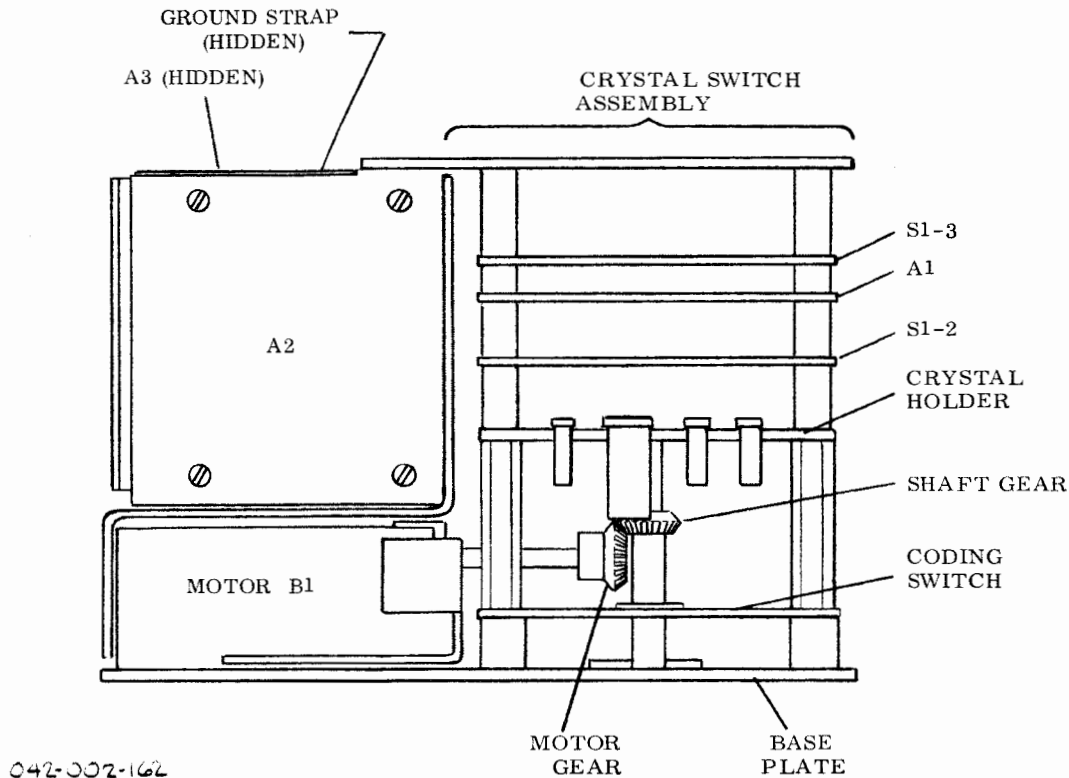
1-MHz Synthesizer Subassembly A2A6A1, Disassembly Parts Location
